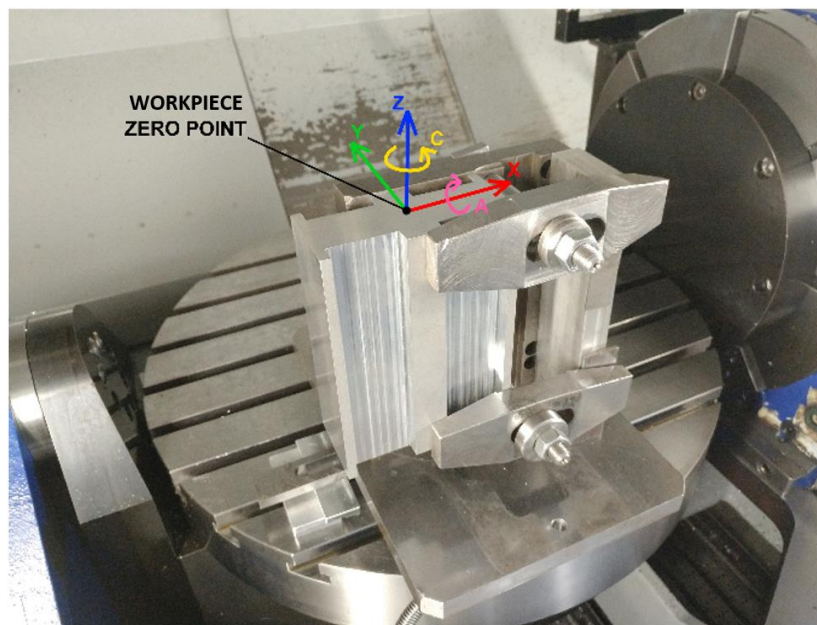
Clamped Workpiece by Angle Fixture and Machine Coordinate System
